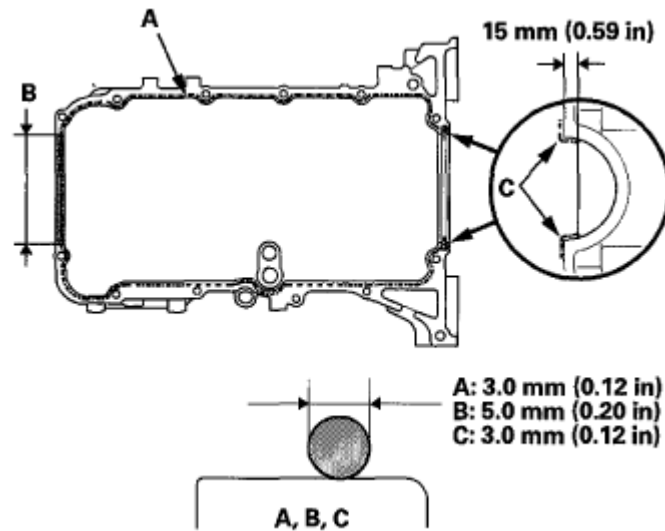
Identifying Diameter Bead Of Liquid Gasket On Broken Lines
